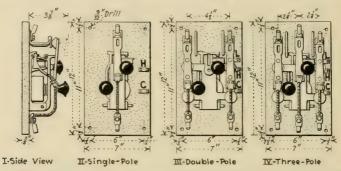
Drilling dimensions of single-, double-, and three-pole remote-controlled switches. (Clearance dimensions as shown in side view are the same for each switch shown in II, III and IV. Cutter-Hammer Mfg. Co.)
